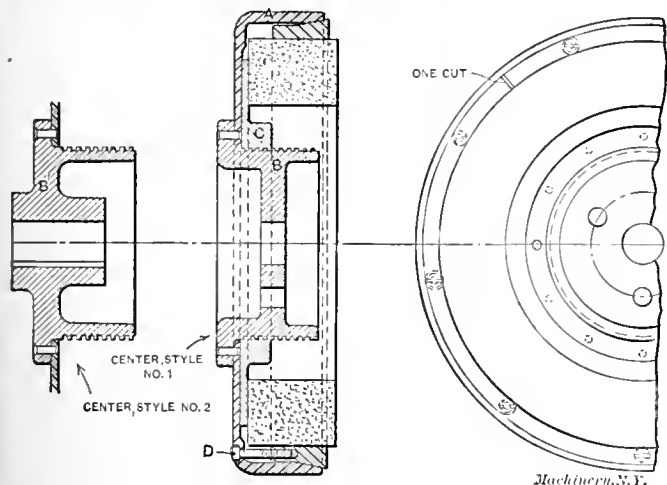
Sectional View of the Graham Pressed Steel Grinding Chuck
